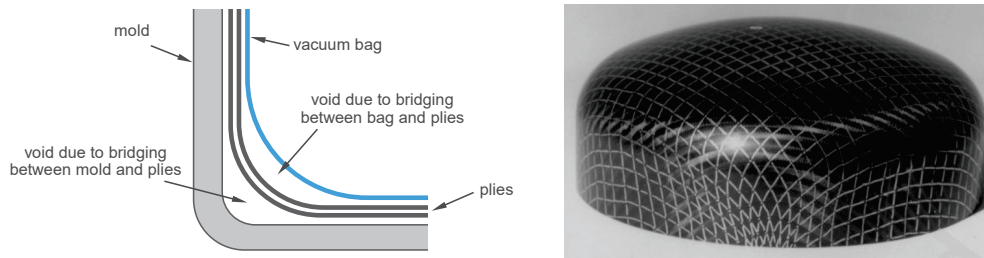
(a) Bridging; (b) Shearing caused by draping [19]
